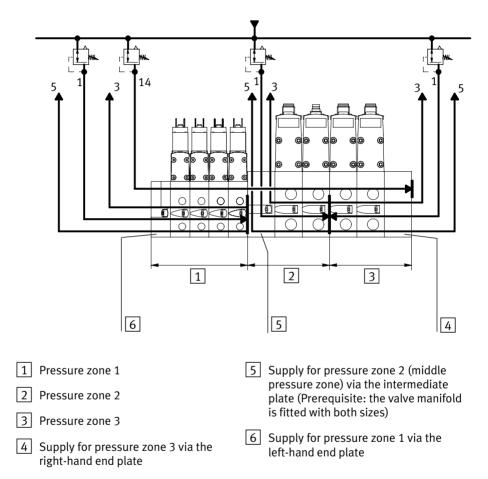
/3: Example of VTIA valve manifold with 3 pressure zones and pilot control with external pilot air
